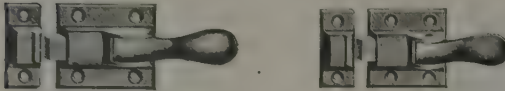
Refrigerator Catches. Russell & Erwin Manufacturing Company.
